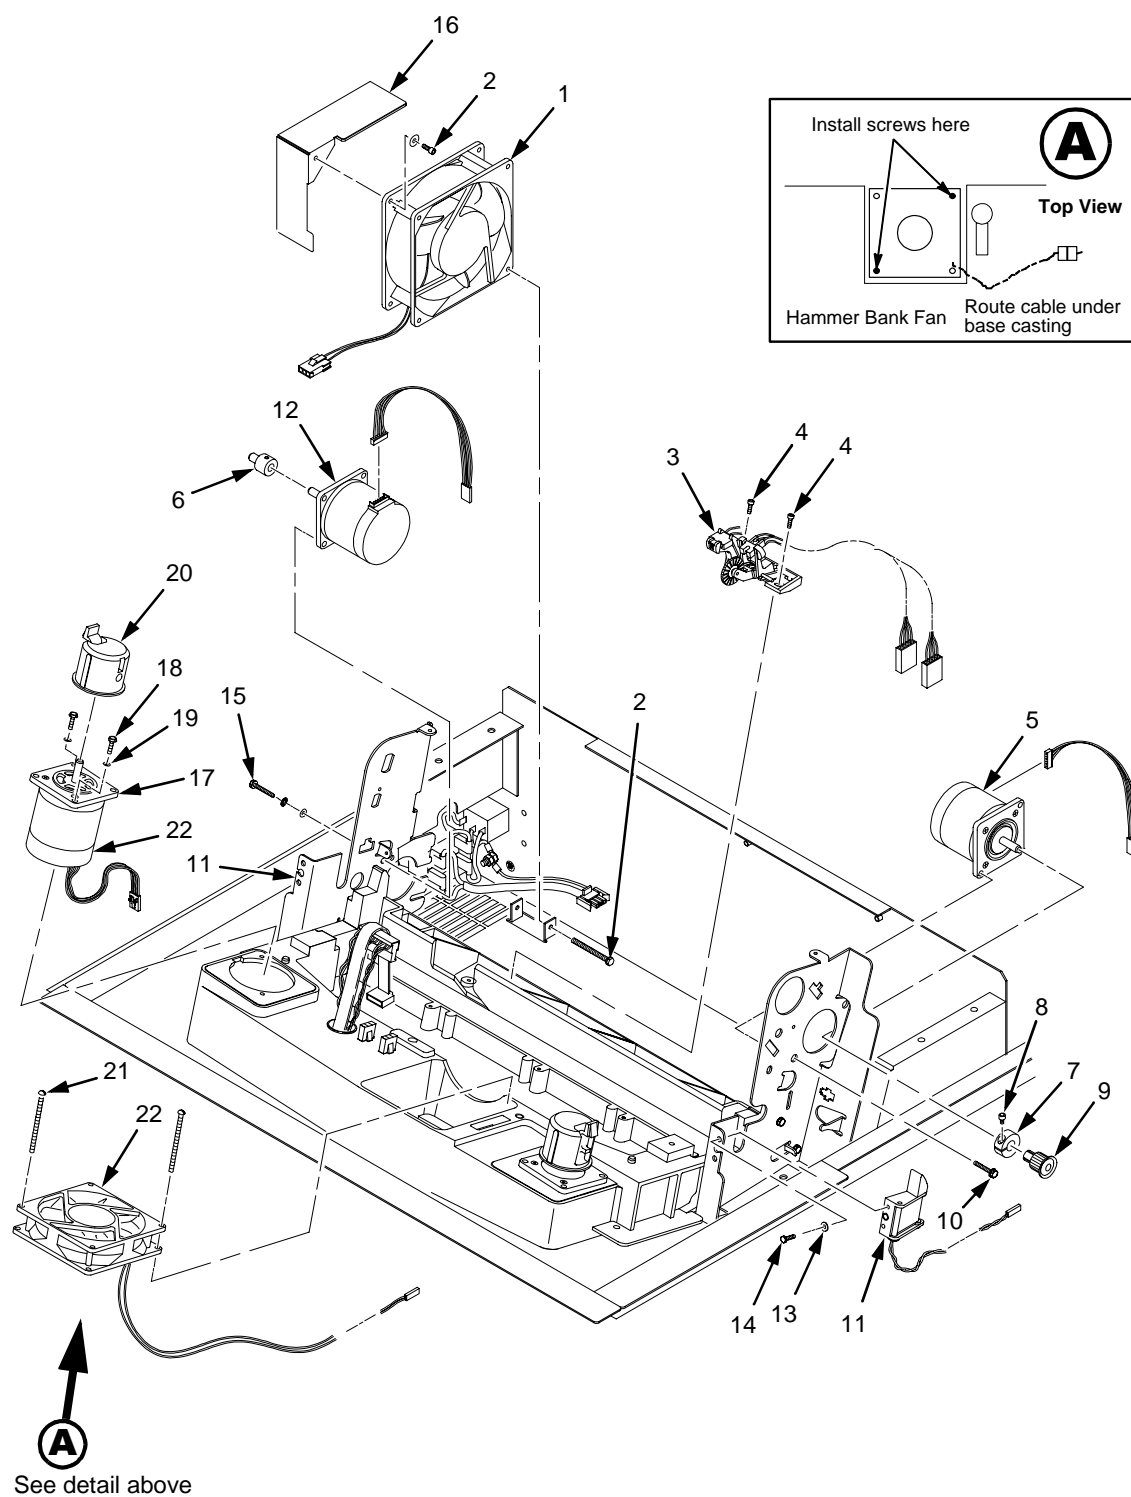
Motors, Card Cage Fan, and Paper Detector Switch
